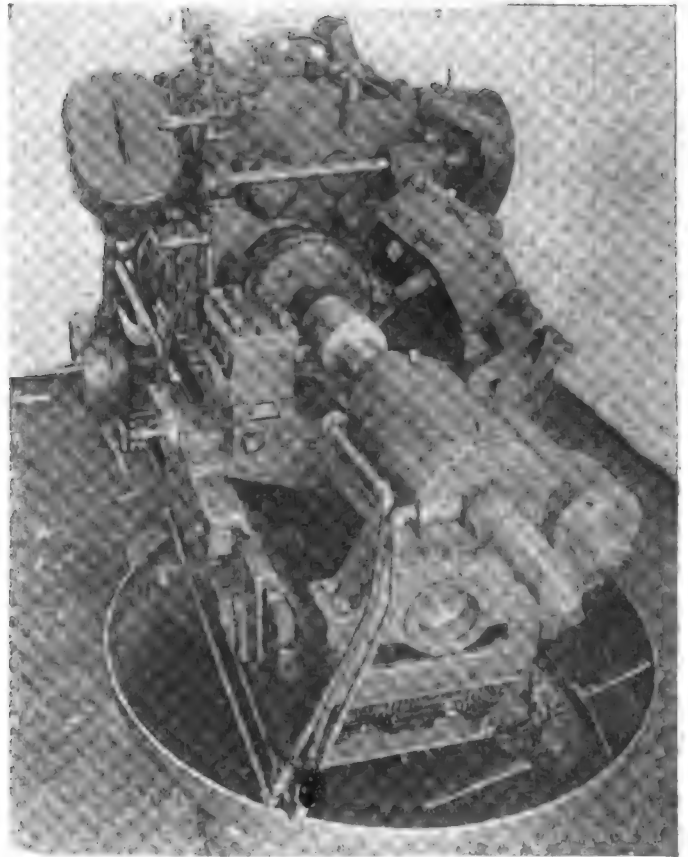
Outer end of piston held by air-operated tailstock of Fay lathe
